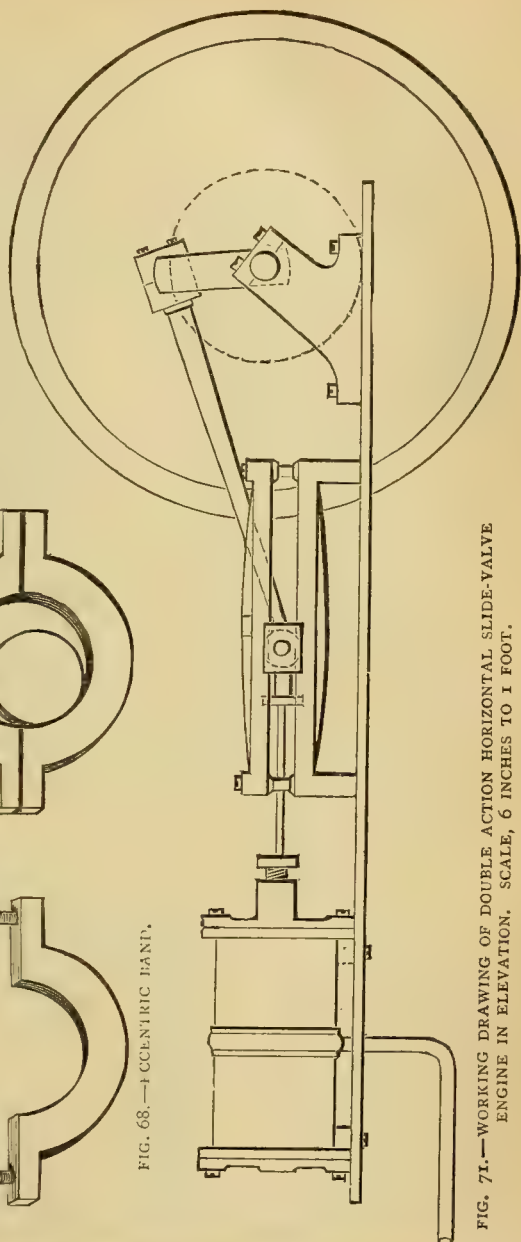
WORKING DRAWING OF DOUBLE ACTION HORIZONTAL SLIDE-VALVE ENGINE IN ELEVATION. SCALE, 6 INCHES TO 1 FOOT.
